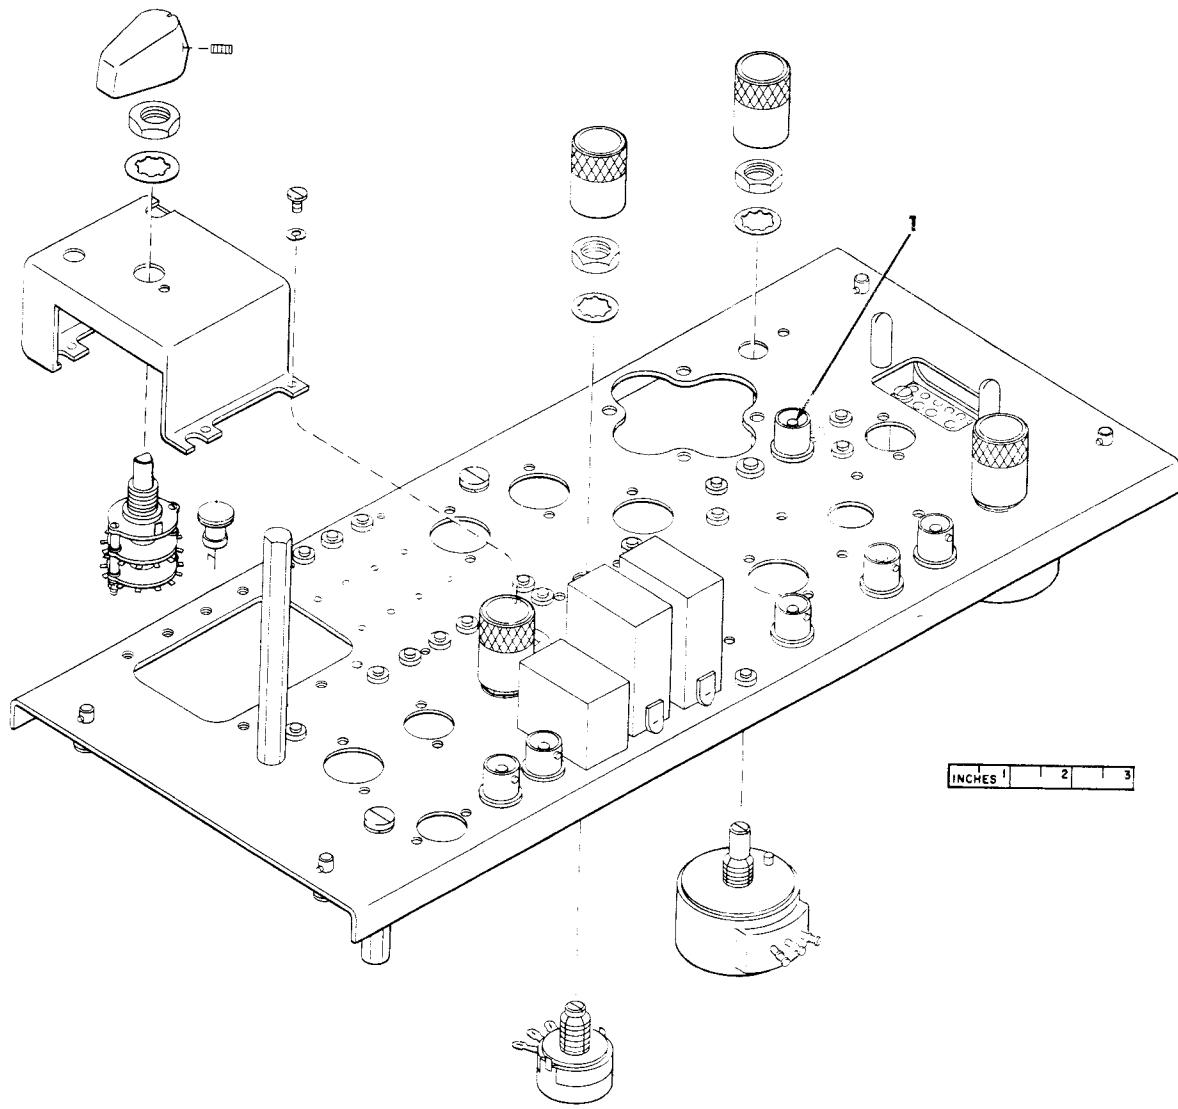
Synchronizer, electrical (9144786)—partial exploded view
